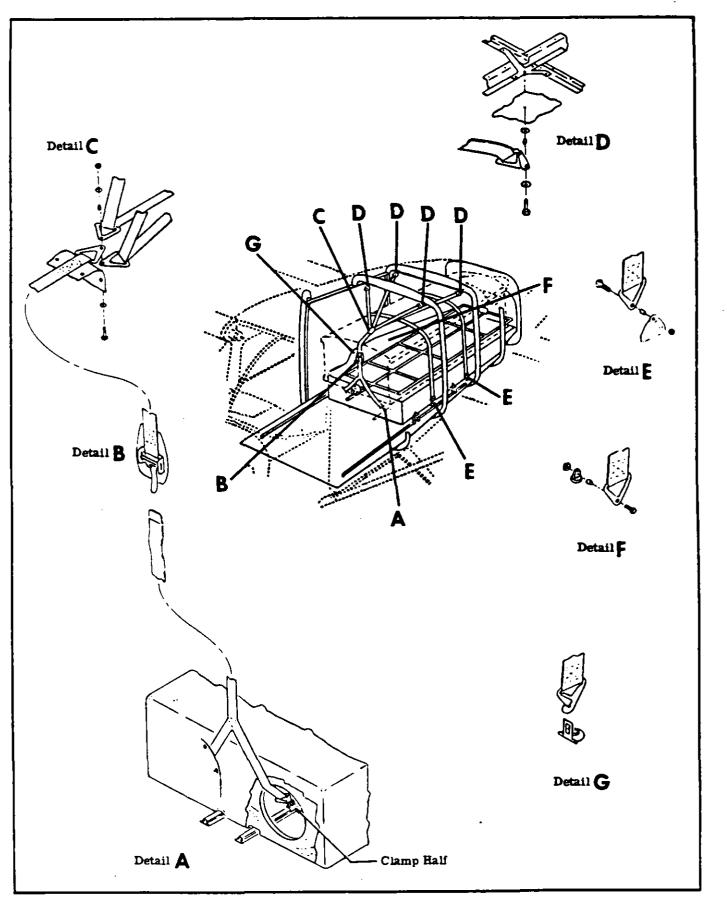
Casket Carrier Installation (Sheet 2 of 2)
